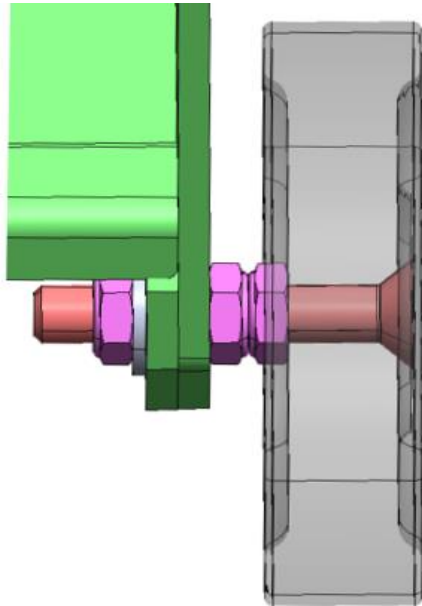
COLOUR-CODED WHEEL SUBASSEMBLY.
